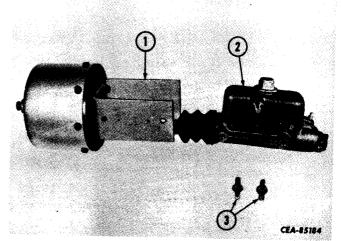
SM-H-90E (Rev. No. 4 11-71)
